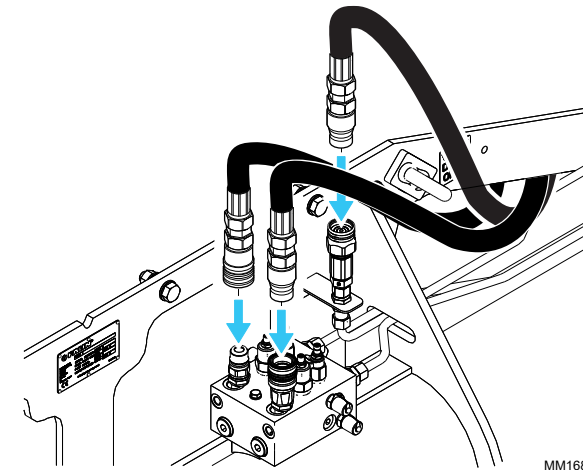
Connect Hydraulic Hoses to the Dispenser
